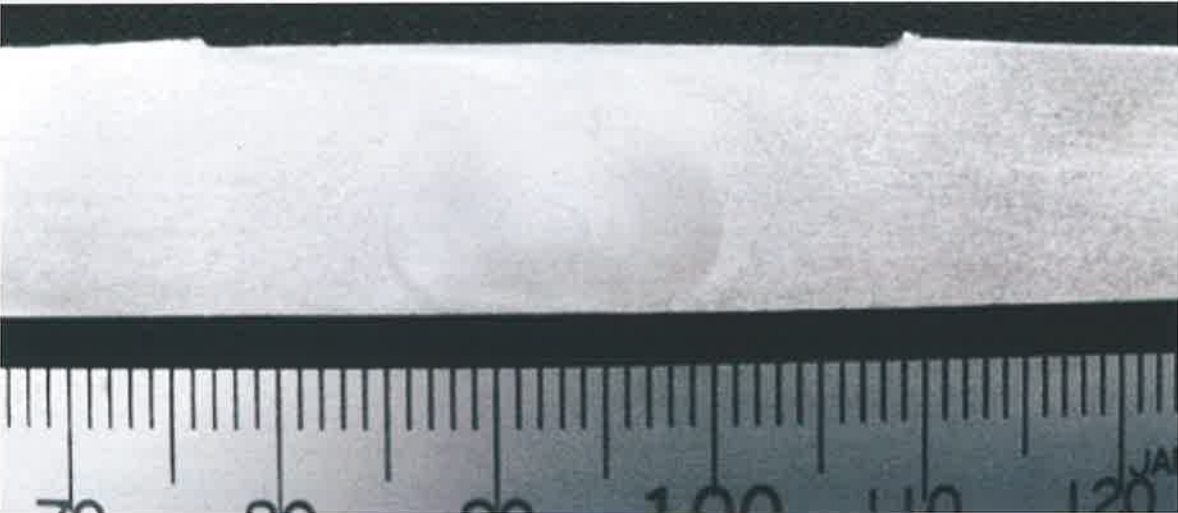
Weld 313B – transverse to the weld travel direction
